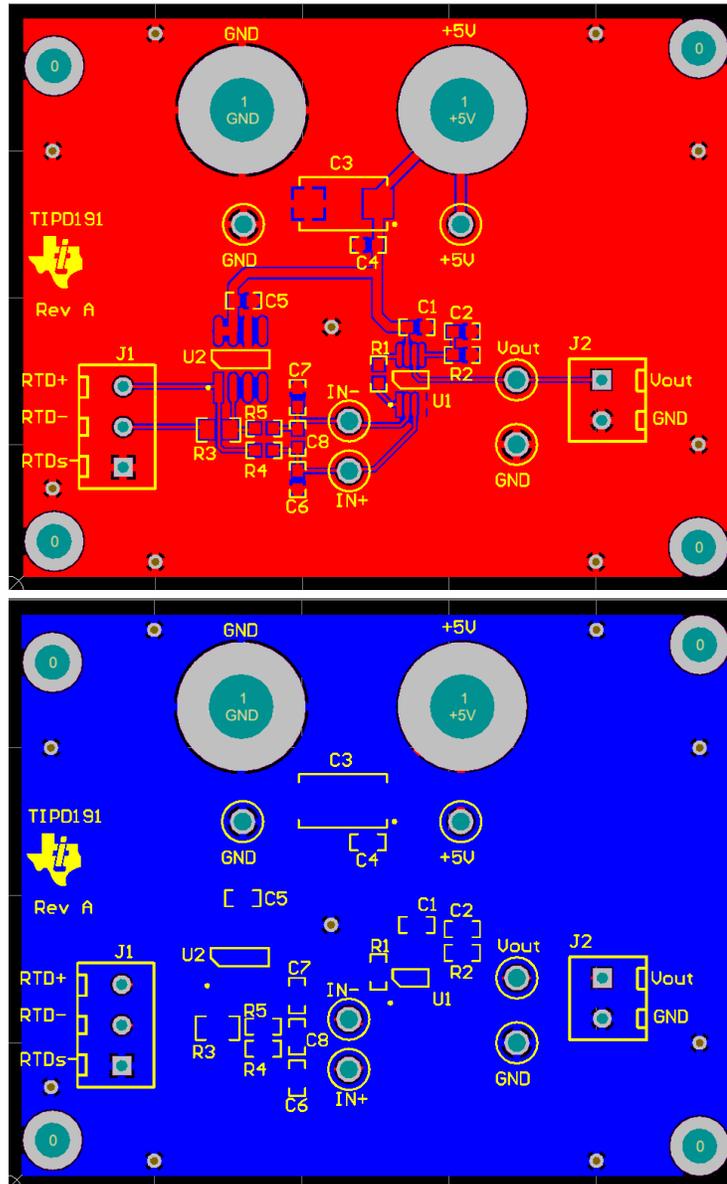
PCB Layout (Top - Red, Bottom - Blue)
